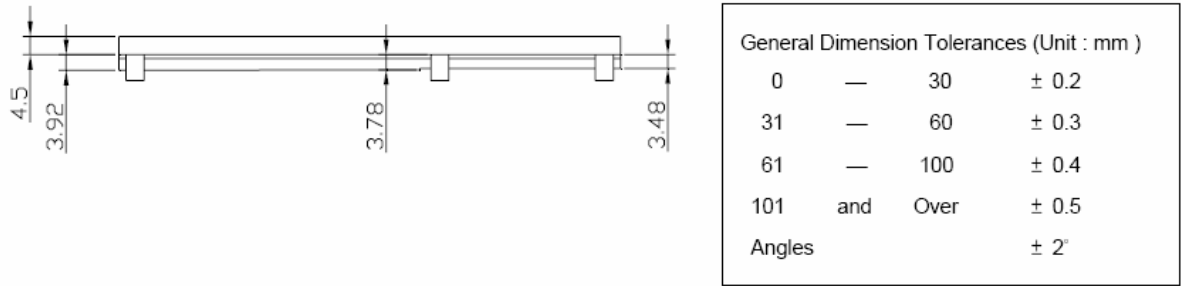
SOM-Express Heat-Spreader Tolerances
